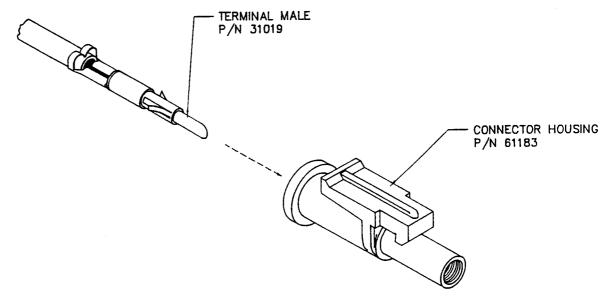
LAMP CONNECTOR (AL-5113) ASSEMBLY
